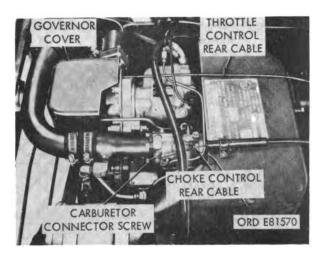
Location of governor cover, throttle and choke rear control cables.
